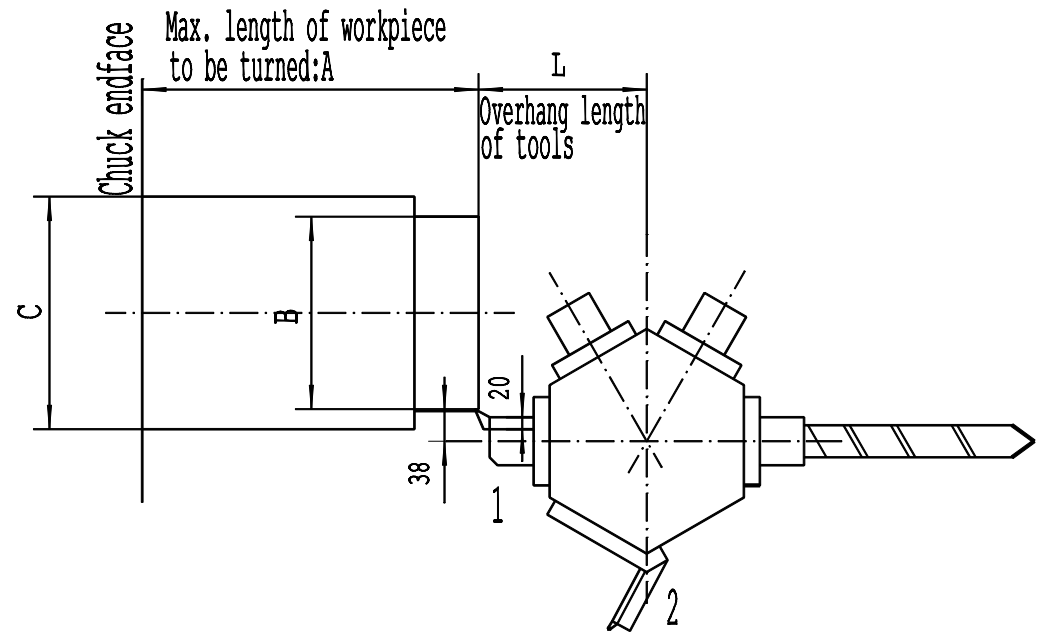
Drawing for max-turning-size of vertical 6-station turret
